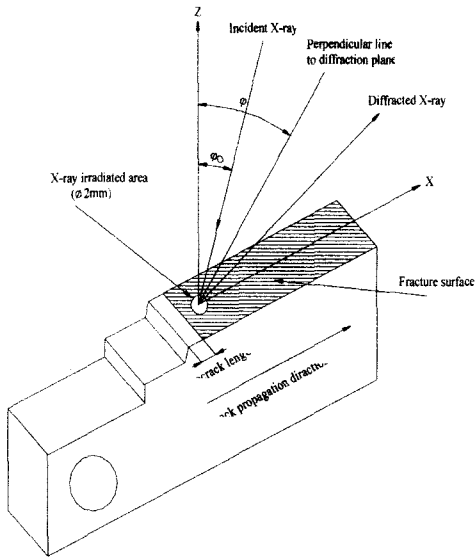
Schematic illustration of X-ray irradiated area on fatigue fracture surface
